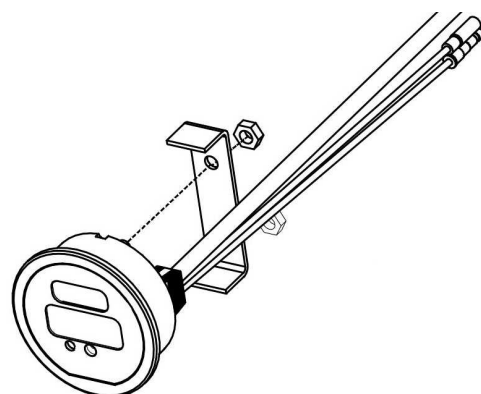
Attachment of the display using the bracket and mounting nuts.
